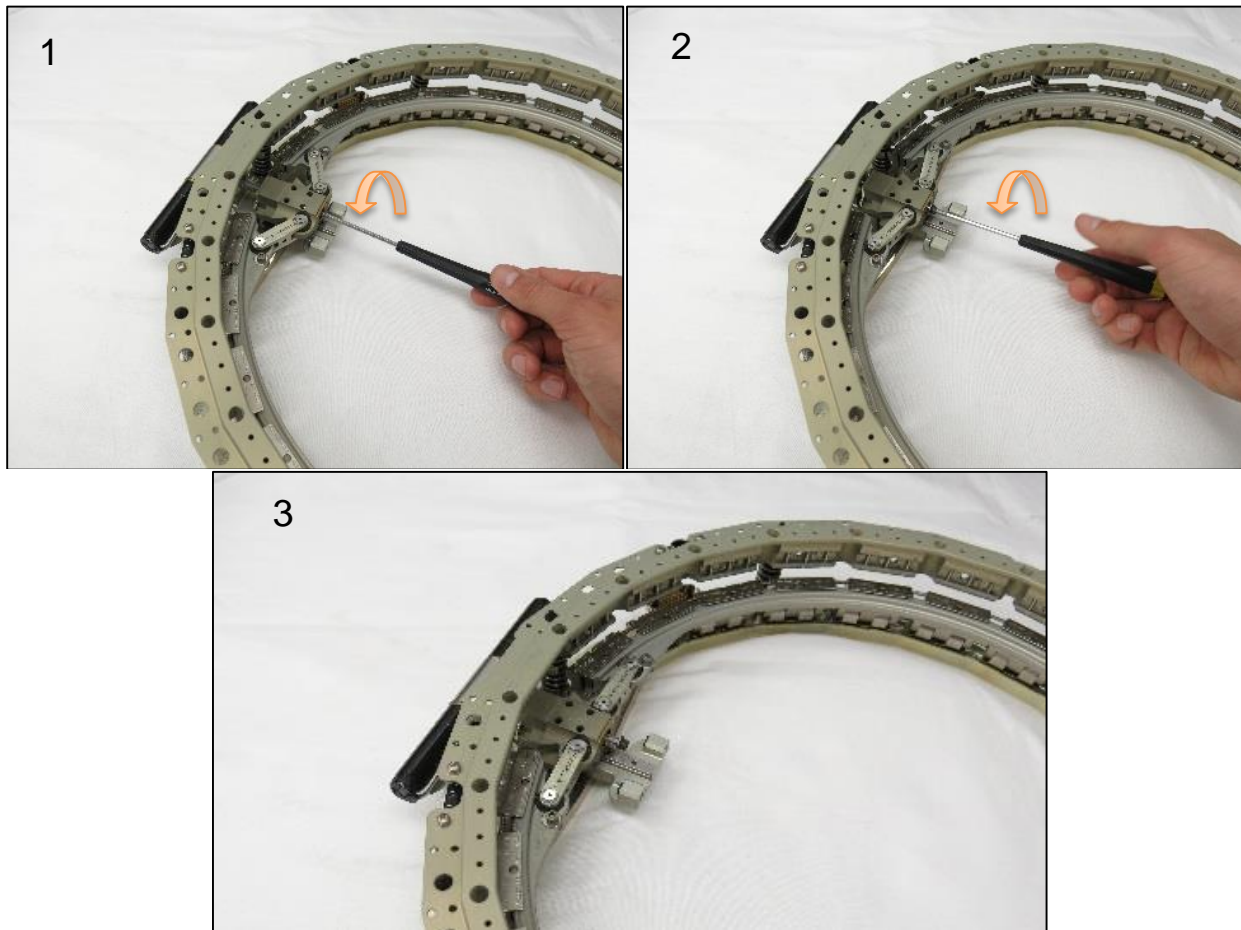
Manually rotating the Ball Screw until the Sliding Tube contacts Motor Bracket
